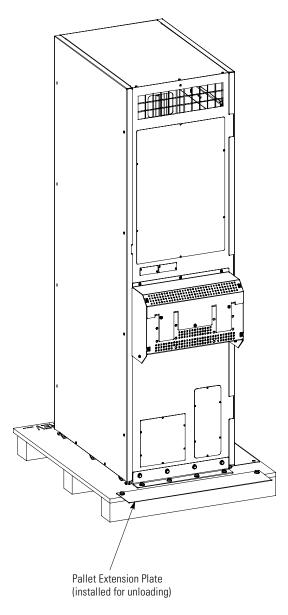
Installing the Pallet Extension Plate – 93E 60IAC
